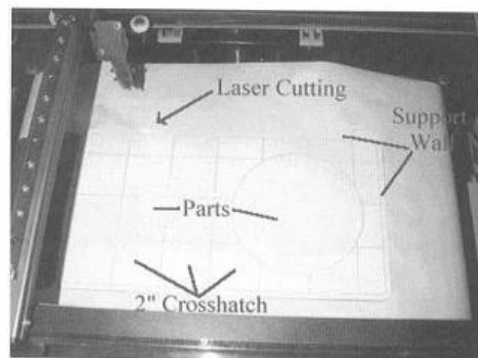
The LOM cuts through the paper layer with a carbon dioxide laser in the shape of the part cross section.
